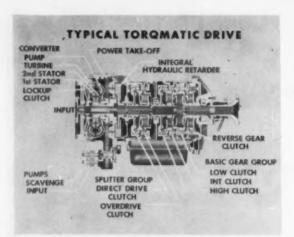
Typical Torquatic drive has a torque converter and hydraulically actuated, full-torque-shifting transmission. Integral hydraulic retarder is often optional
